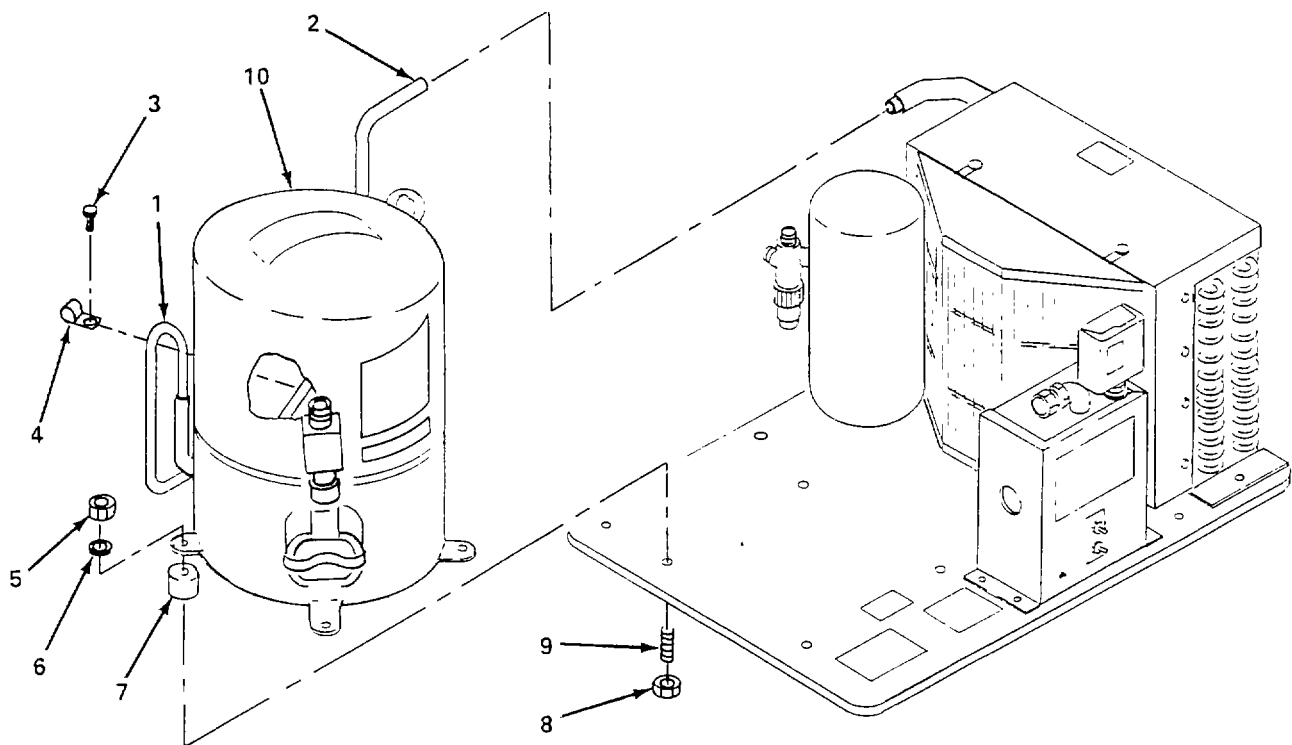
Condensing Unit Hermetic Compressor, Replace.
